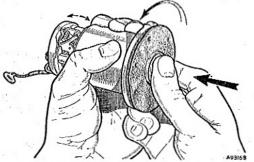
Setting the diaphragm. Unscrew until the rocker just 'throws over'
